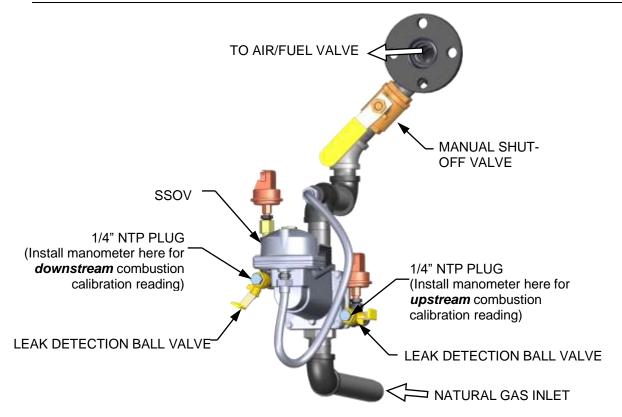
1/4 Inch Gas Plug Location – BMK750 & 1000 (P/N 22322 shown)
